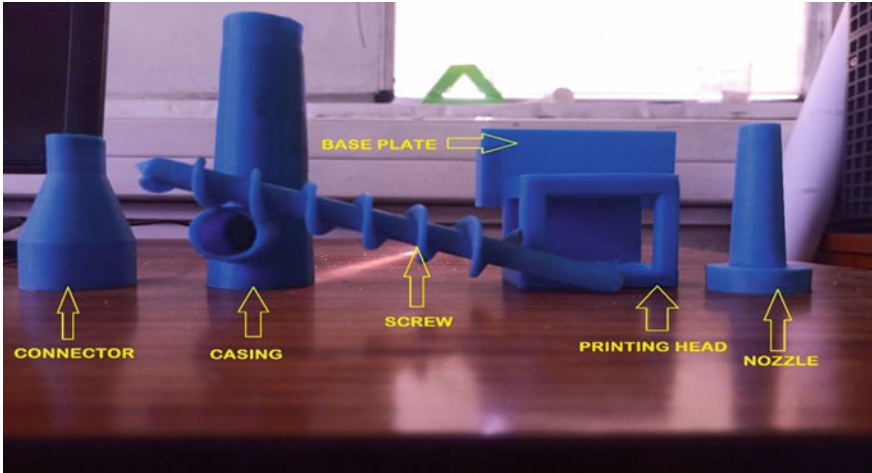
3D printed equipment's used for mortar mix 3D printing
